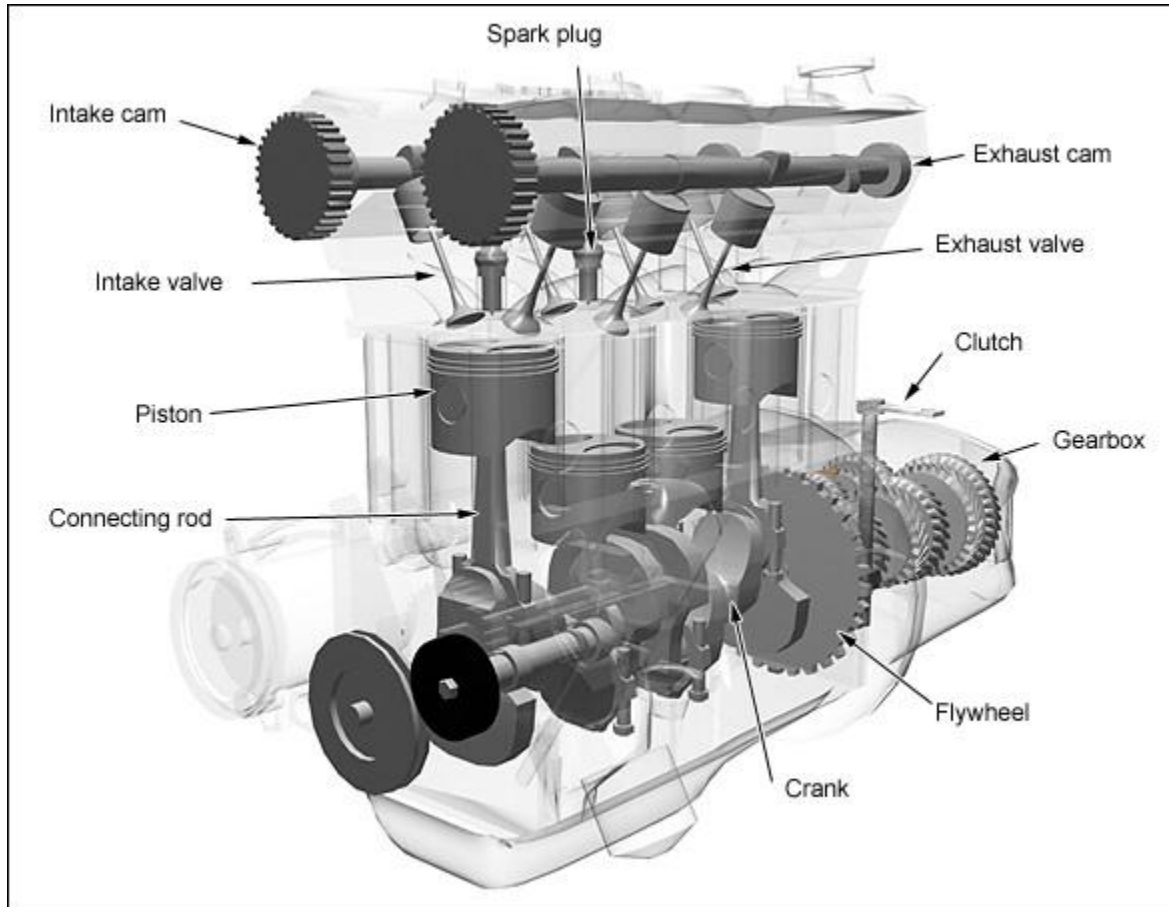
Typical Four Cylinder Internal Combustion Engine.
